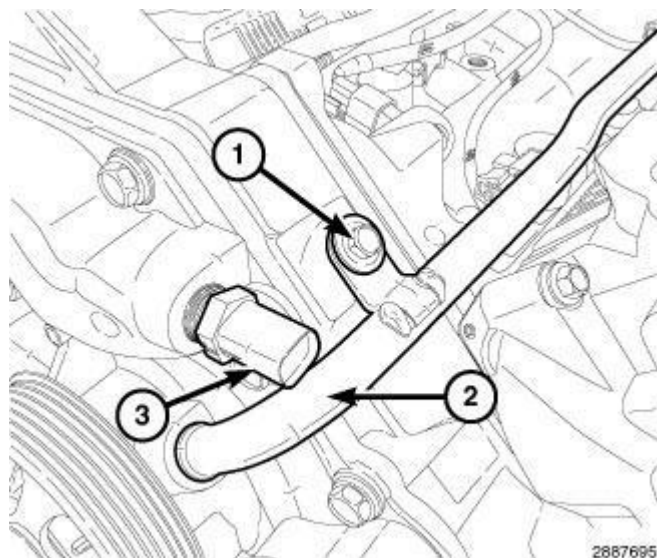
Coolant Temperature Sensor, Heater Tube & Retaining Bolt
